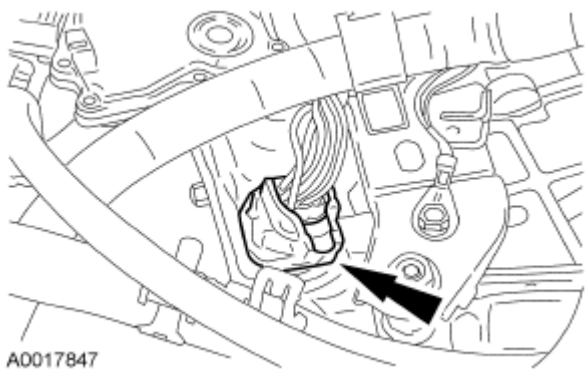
Locating Transaxle Wiring Harness Electronic Control Switch Electrical Connector
